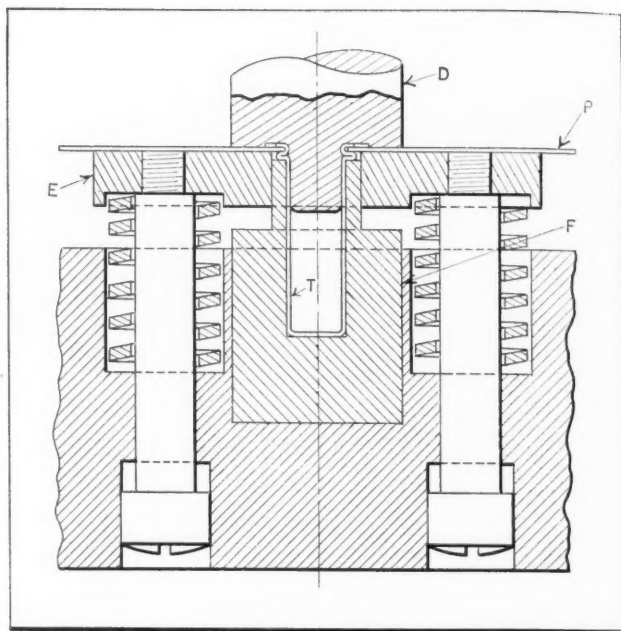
Die for Curling and Clinching Open End of Tube *T*, Fig. 1, to Hole in Plate *P
